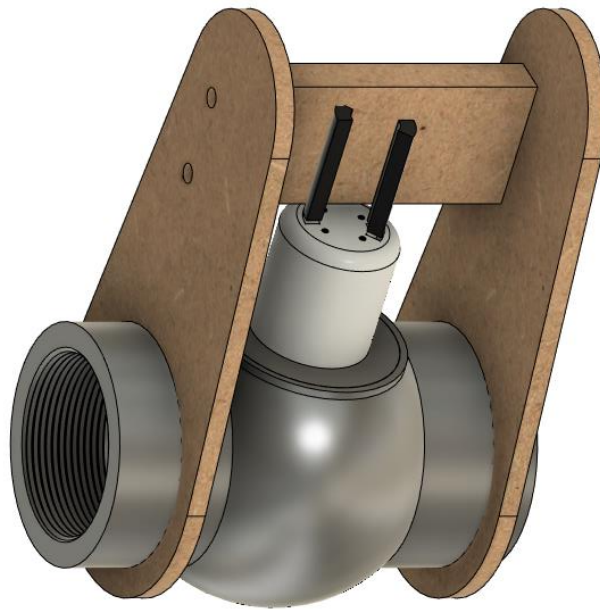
Servo Bracket with Modified Ball Valve and Adaptor
